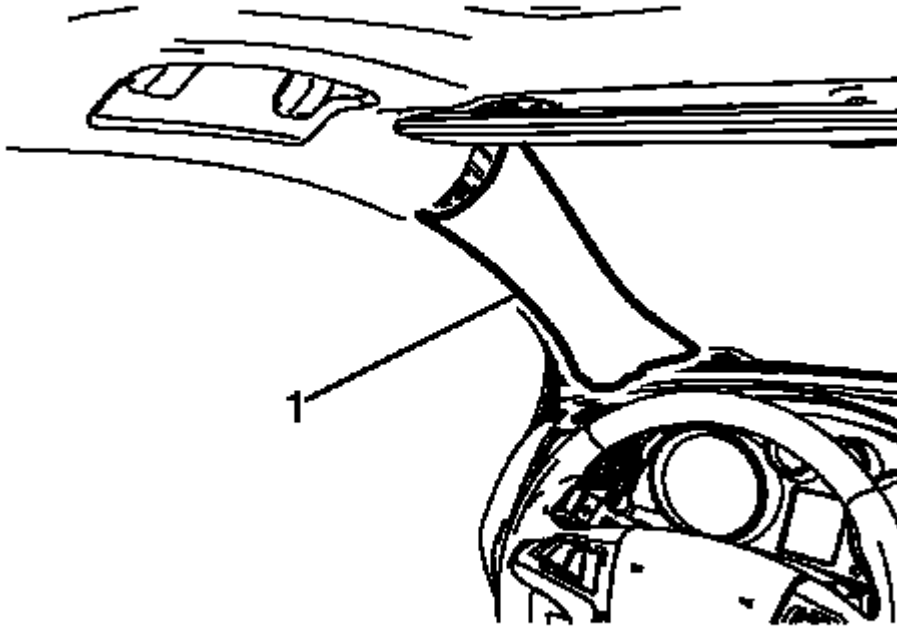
Upper Side Of The Windshield Side Garnish Molding
